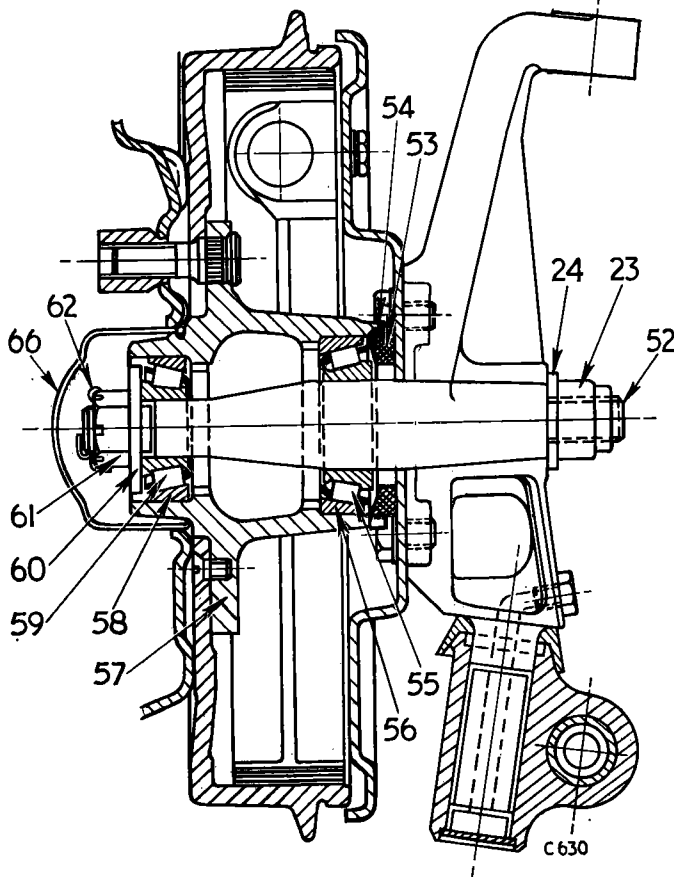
Cross section of Herald 1200 drum brake and hub assembly
